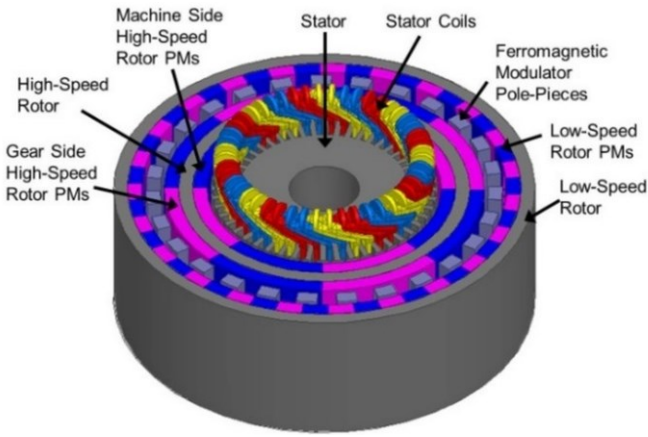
Inner Stator Radial Flux Magnetically Geared Machine
